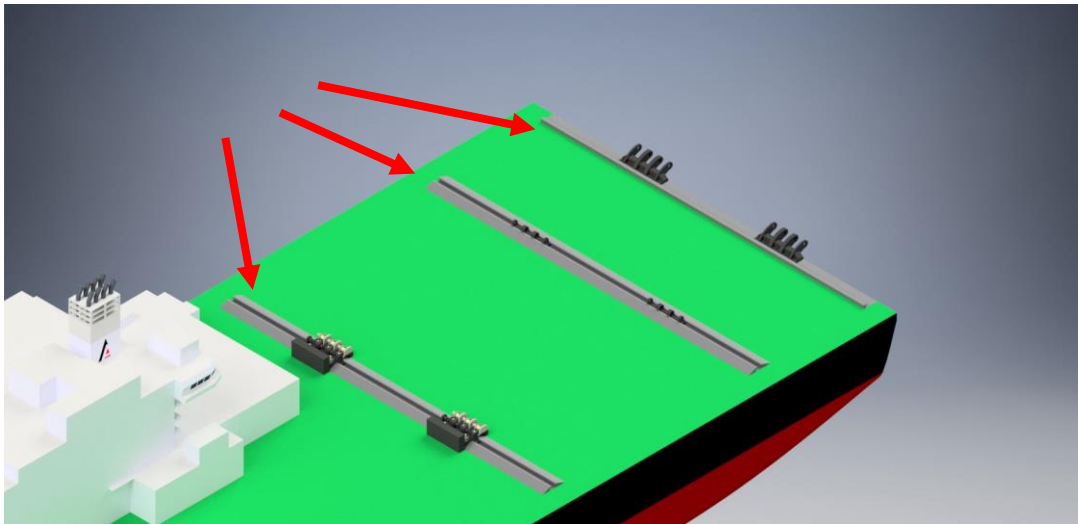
Transverse Reinforced Frames and Base (hinge) Construction
